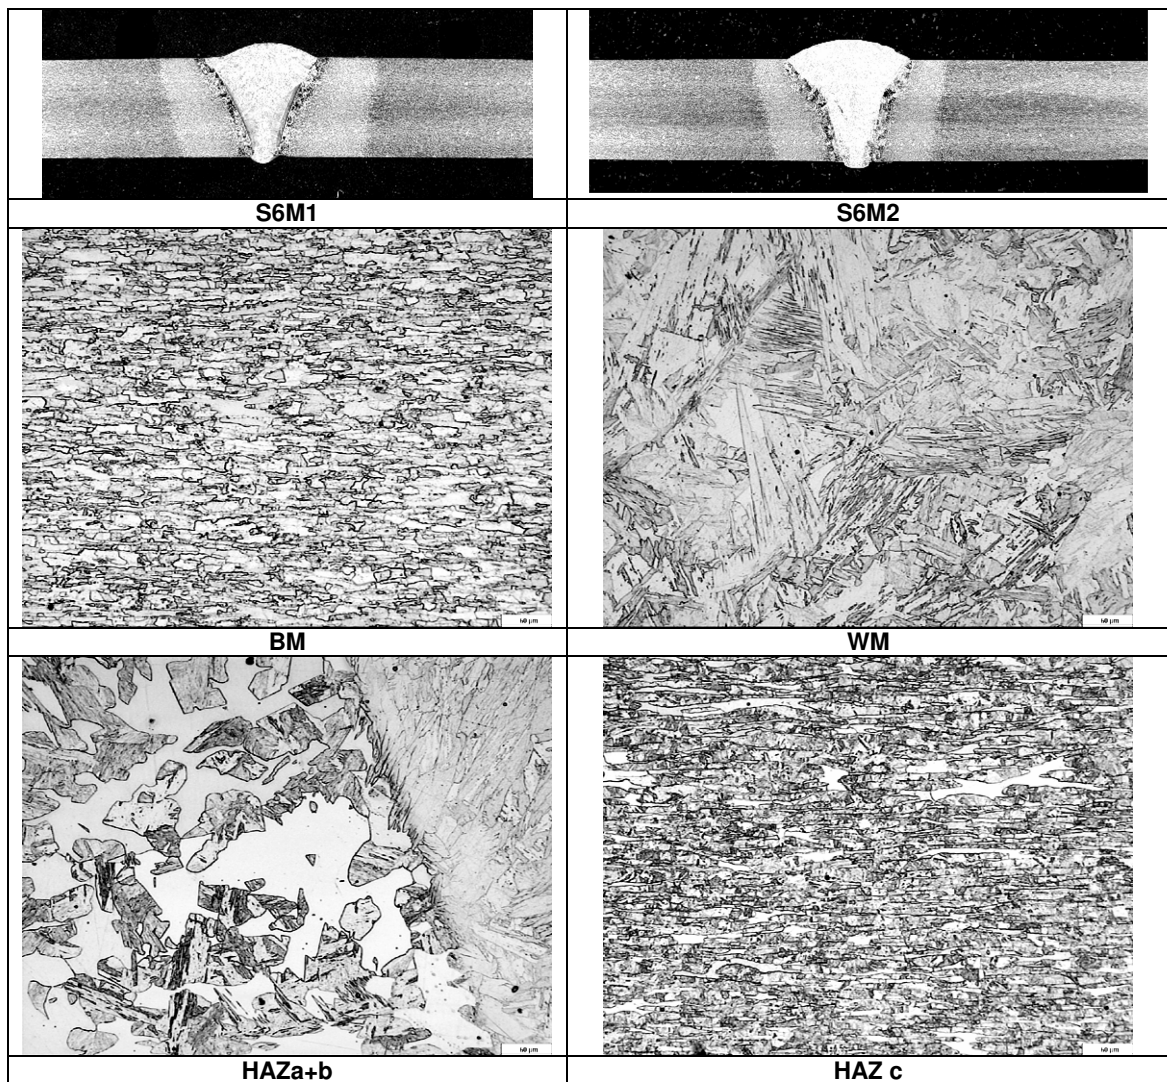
Macro and micrographs of 6 mm thick Plasma weld with 316L filler (S6).
